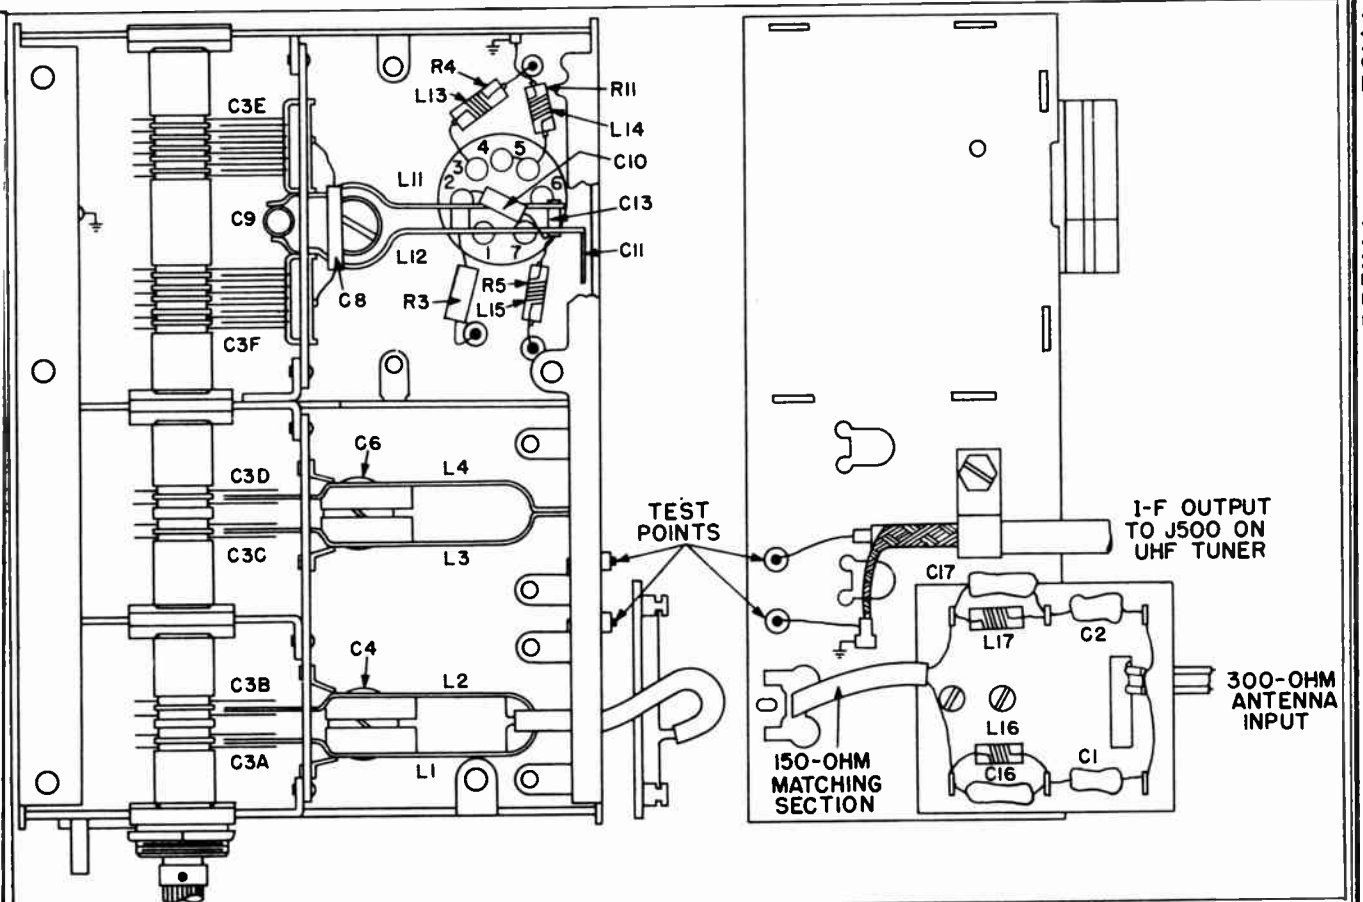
Side View and Base View of Tuner-Adapter UT20A, Part No. 43-6591, Without Board Assemblies
